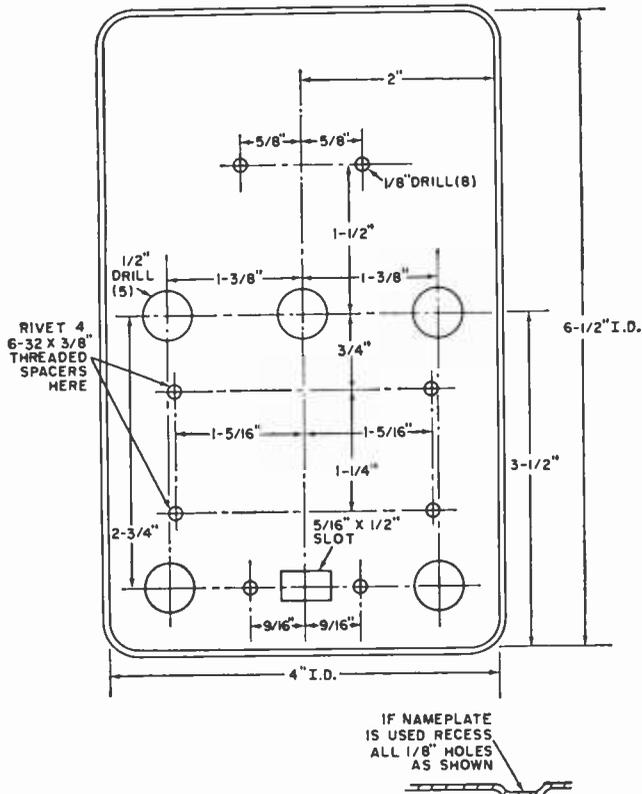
You can use these dimensions to duplicate the front cover layout. Hole sizes should be made to accommodate your hardware and fittings.
